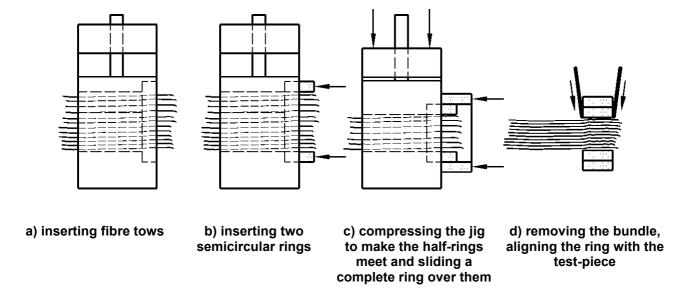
Method of manufacturing test-pieces using the compression jig
